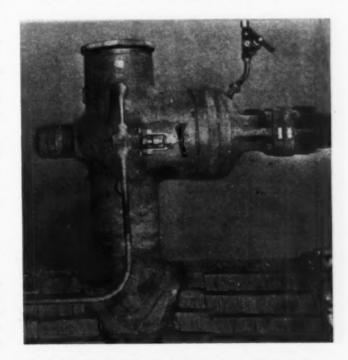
Ten-inch, 900-lb welded-bonnet parallel-slide gate valve welded to 12-in. Schedule 100 pipe. Note ring-andside-plate reinforcement on 12-in. branch connection and welded inspection cap on left side of valve body
